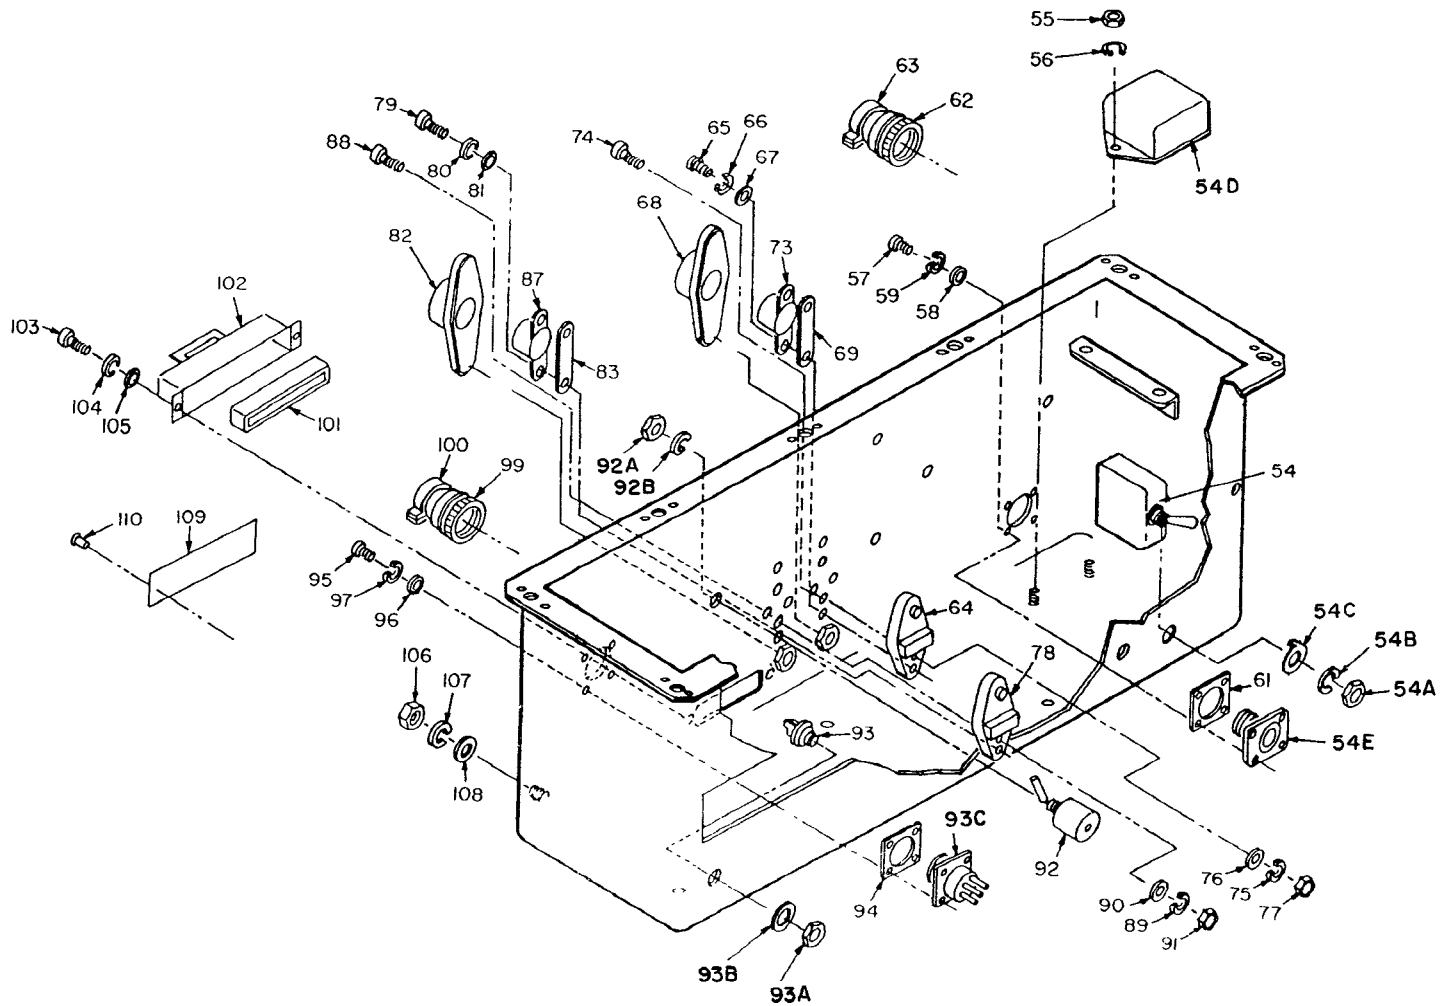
Digital Display Indicator Assembly (Sheet 3 of 3)
